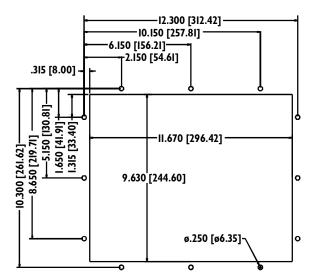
3510/3512 System Cutout Dimensions (inches [mm])
